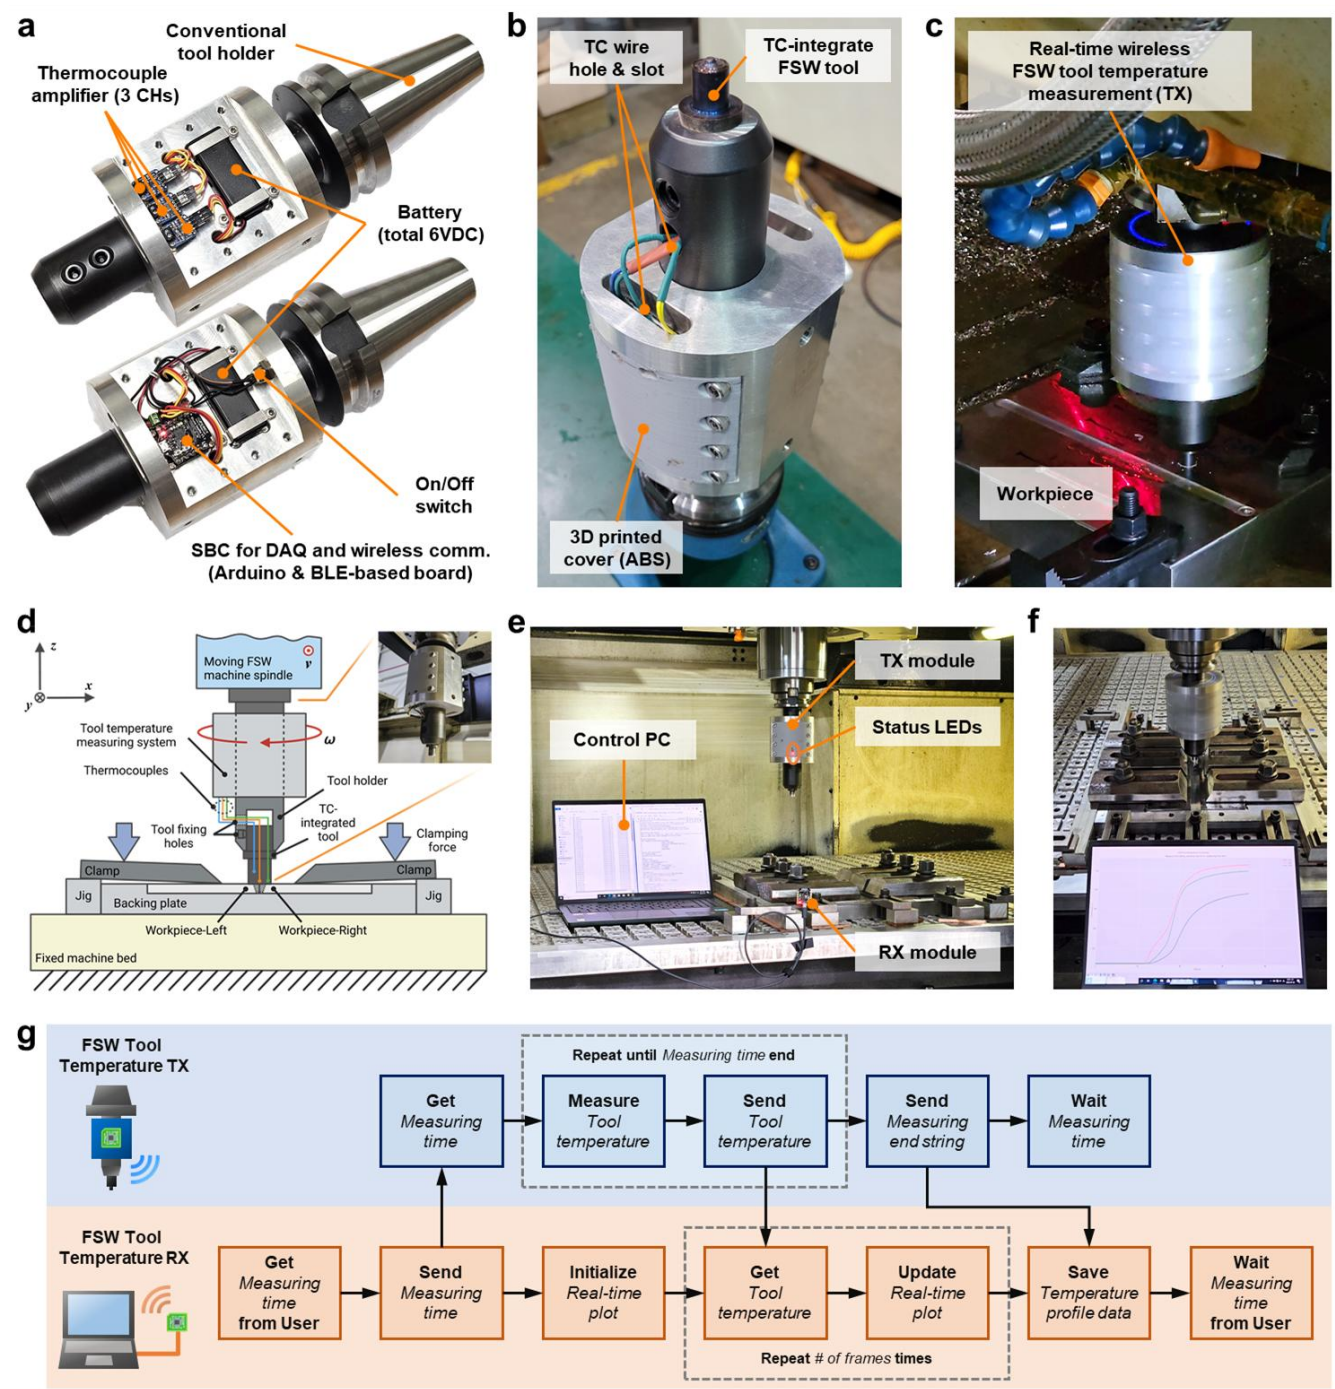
Real-time wireless FSW tool temperature measurement system. a Main component consisting of the measurement system. b Assembled measurement system with a tool holder, the thermocouple (TC)-integrated FSW tool, and covers. c Application of the measurement system in the FSW process. d Schematic of the FSW process setup with the wireless FSW tool temperature measurement. e Transmitter (TX) and receiver (RX) modules of the measurement system. f Real-time plot of the FSW tool temperature profiles. g Flow chart of the program imbedded in the TX module and implemented in the RX module and PC.
